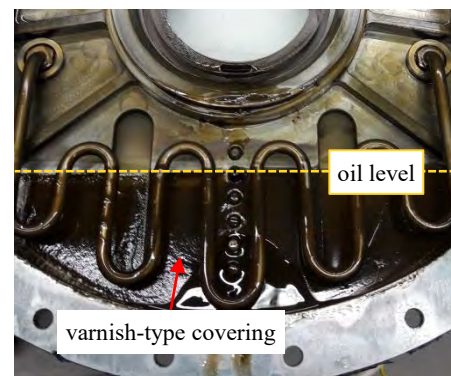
Coverings on the inner surface of the oil reservoir of test bearing I.
